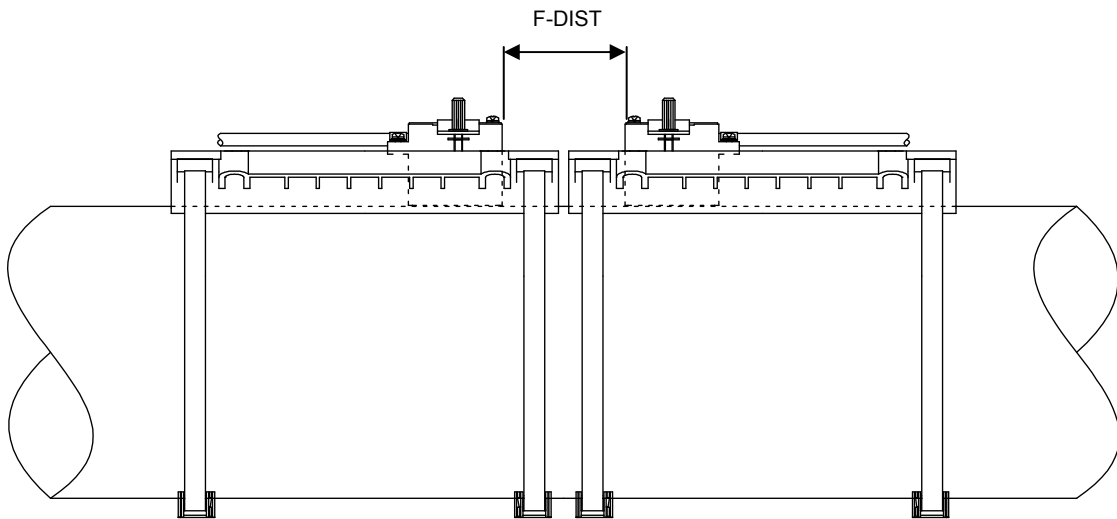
Mounting method for a transducer mounting interval (F-DIST) of 50 mm or more
